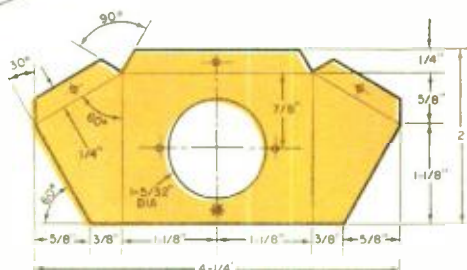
Details of the mounting holes and other mechanical work are shown in this dimensioned sketch.
